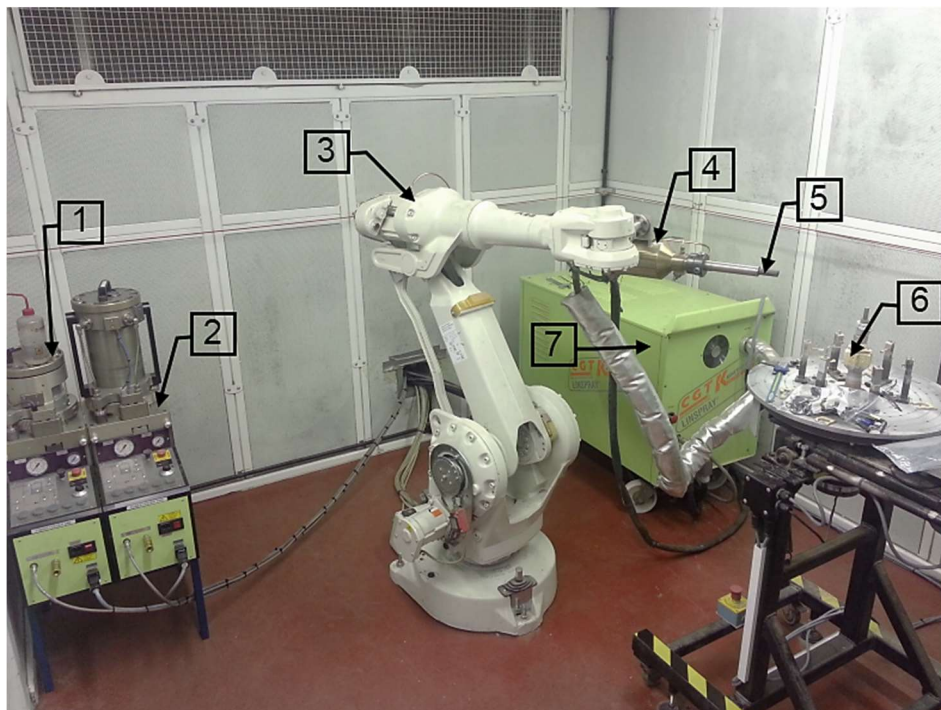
Image of the cold spray apparatus; (1) powder feeder 1, (2) powder feeder 2, (3) Industrial robot, (4) cold spray gun, (5) cold spray nozzle, (6) specimen stage, (7) gas heater
